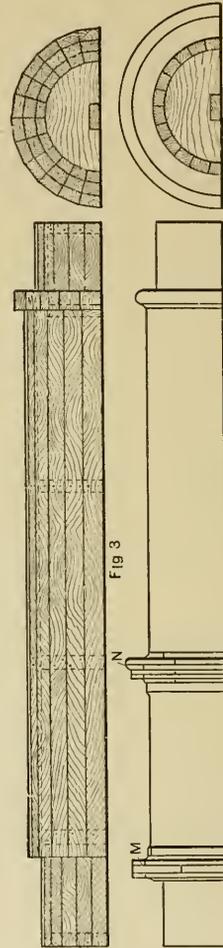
Staving of Cylinder Pattern. Fig. 4. Pattern after Turning
